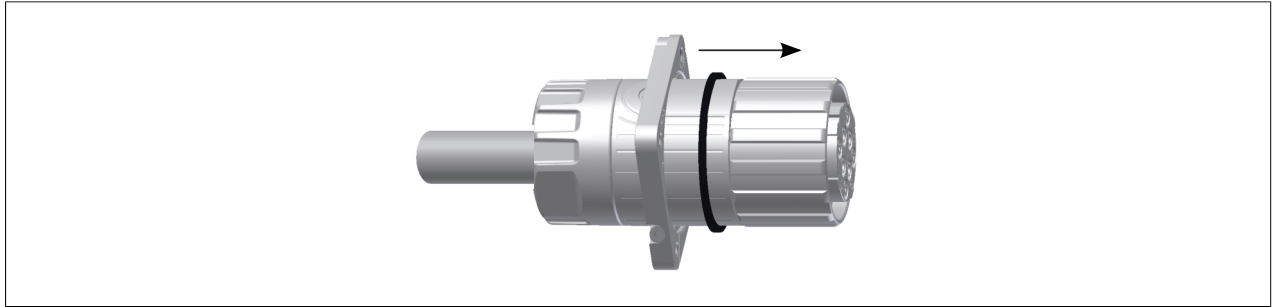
Attaching the metal flange to the connector (rear panel installation)
